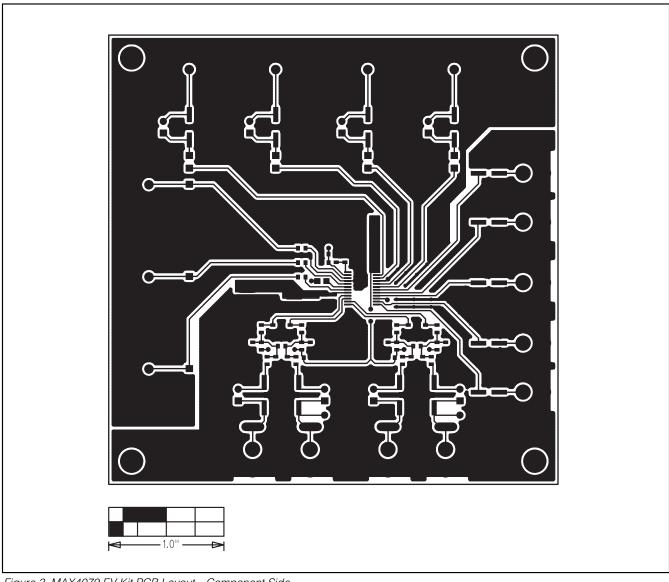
MAX4079 EV Kit PCB Layout—Component Side
